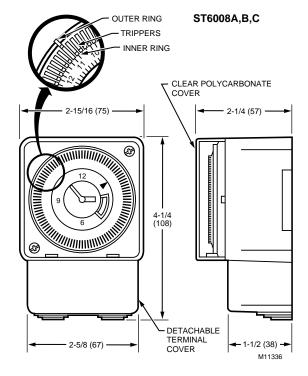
ST6008A,B,C dimensions in in. (mm).
